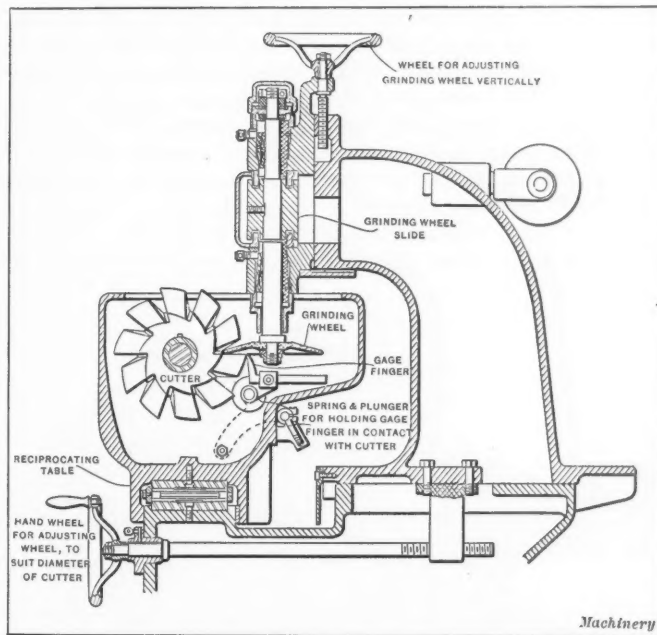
Cross-section through Grinder showing the Gage Finger for measuring the Peripheral Eccentricity
